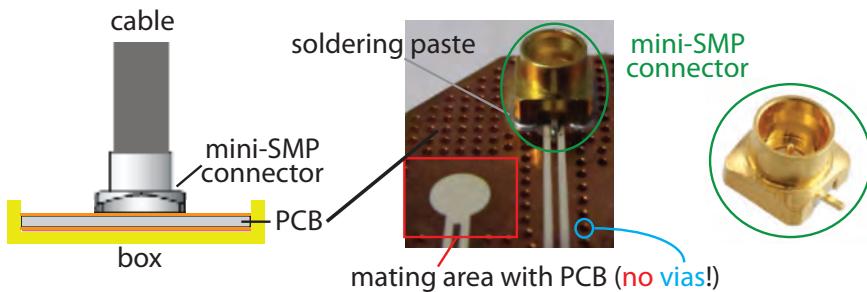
Illustration and photograph of the surface-mount mini SMP connector used in the new PCB design. It is soldered directly onto the PCB, connecting both conductor and groundplanes this way. Also indicated in the left figure is the adaptor, labeled as 'cable'.
